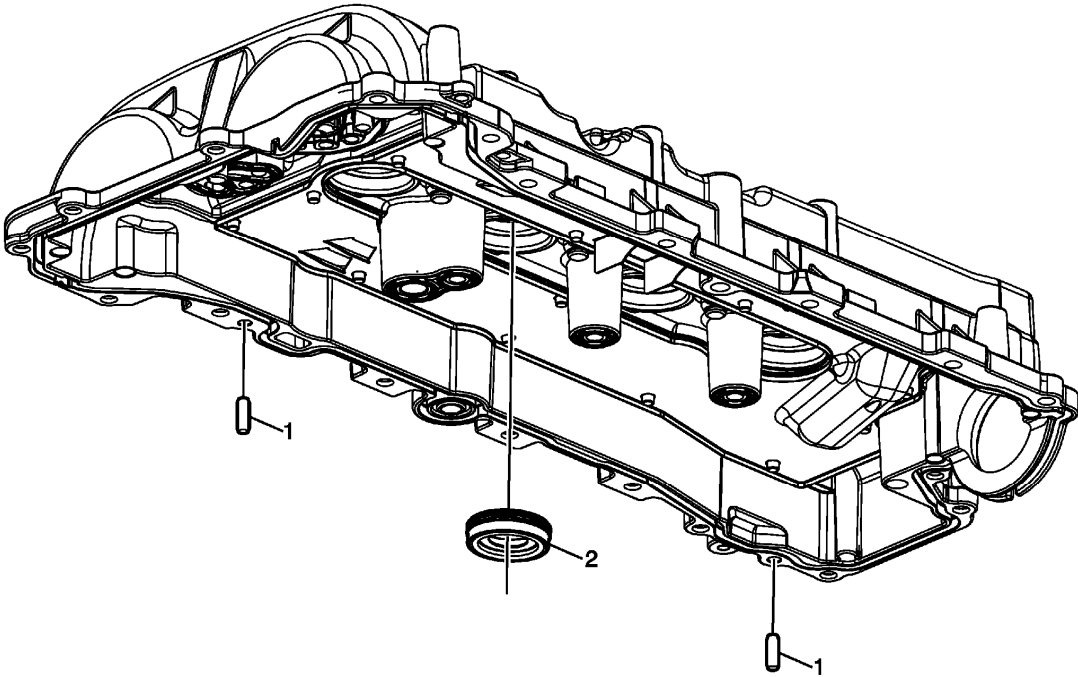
Camshaft Cover Pins & Seal -- Bottom
